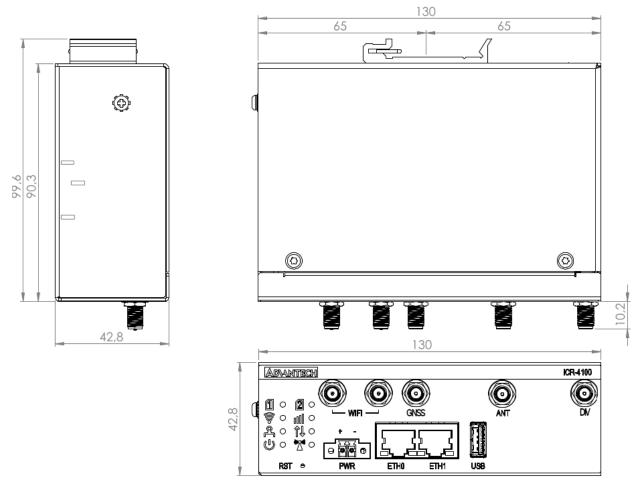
Router Dimensions - Front, Top and Right view with DIN holder
